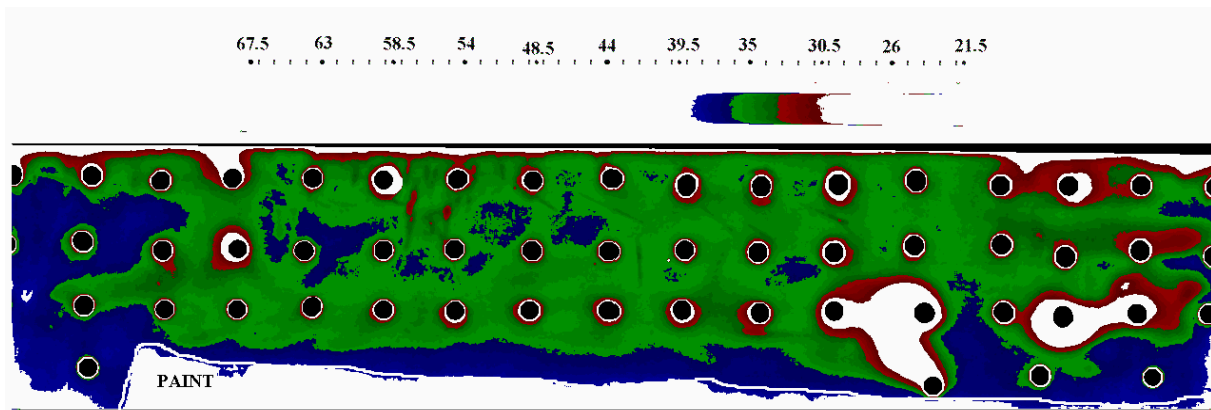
Elongated Holes from Rivet Removal and Skin Thinned by Corrosion Removal.
